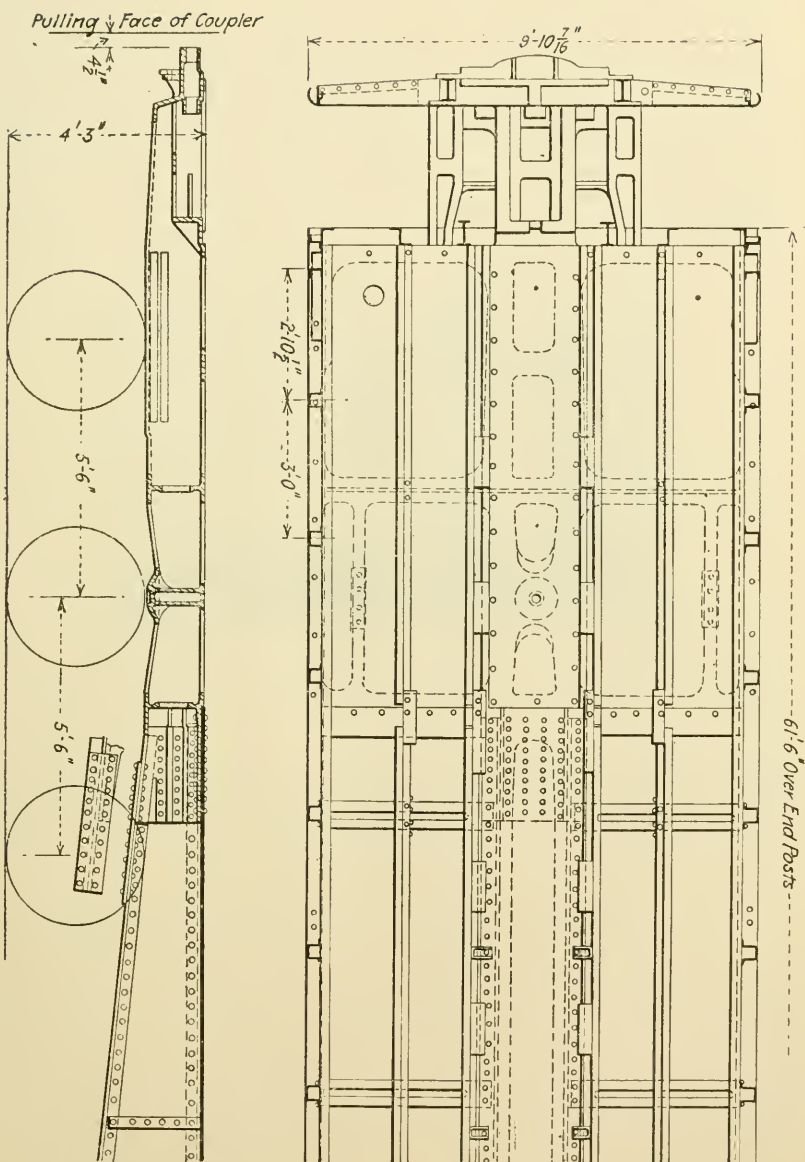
STEEL CAR TYPE, CENTER SILLS CONNECT AT BOLSTER WITH A STEEL CASTING
